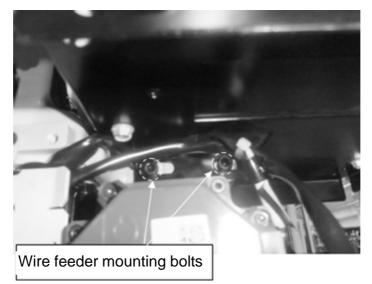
(b) Replacing the wire feeder Auto drive 4R220 (2/3)
